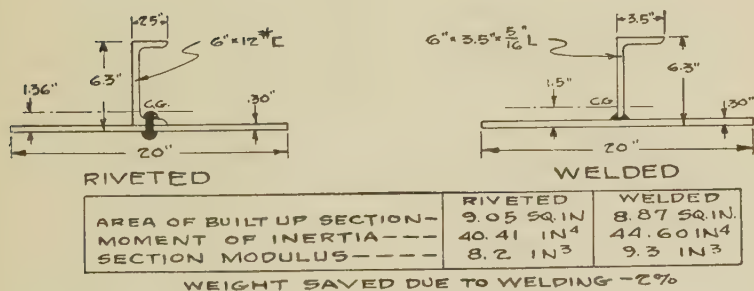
Comparative designs of main frames and bulkhead stiffeners for riveted and welded freight ships.
